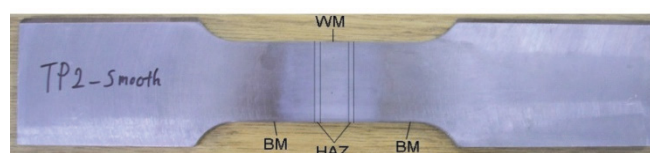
Welded Tensile Panel, as prepared for testing
